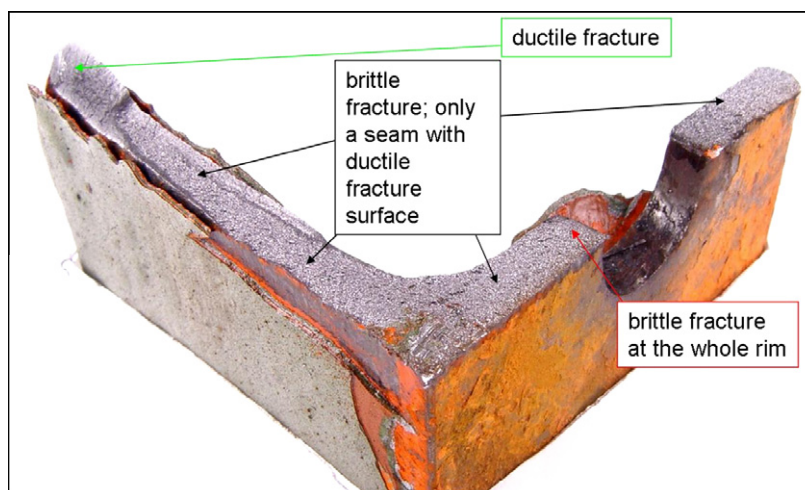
Fracture surface M65-09 after mechanical tests in the laboratory. Similar fractographic appearance as the original fracture surface, cp. Figs. 6 and 7.
